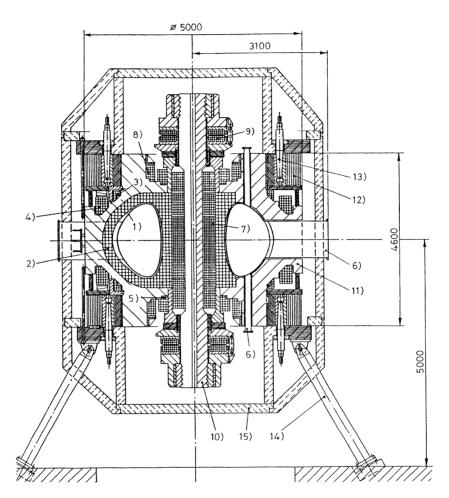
Main components of the Ignitor machine: 1) plasma chamber, 2) toroidal magnet, 3) shaping coil, 4) equilibrium coil, 5) outer transformer coil, 6) equatorial and vertical ports, 7) central solenoid, 8) shaping + transformer coil, 9) axial press, 10) central post, 11) C-clamp, 12) shrink ring, 13) tensioning wedges, 14) supporting legs, 15) cryostat, $R_0 = 1300$ mm, a = 470 mm, b = 870 mm.
